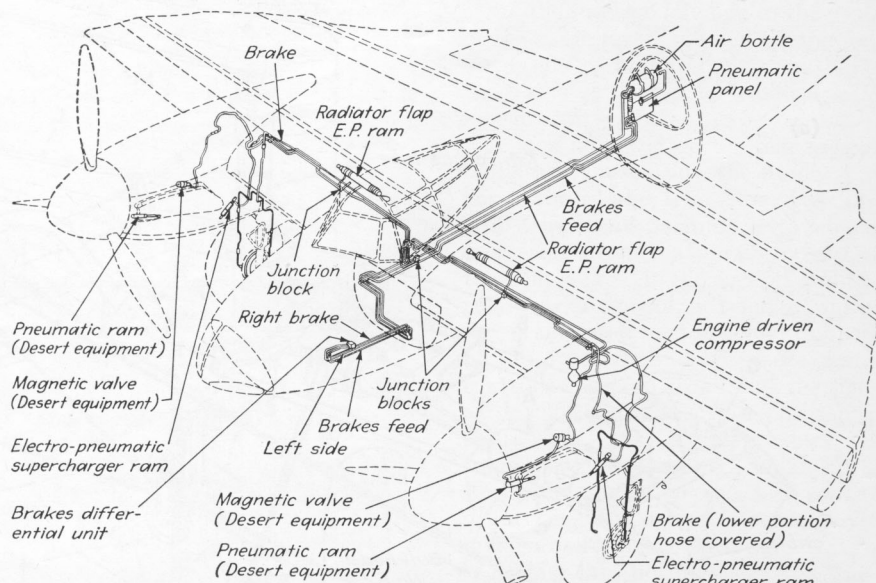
Pneumatic controls operate brakes, air-intake flaps, supercharger controls, and radiator flaps for regulating engine temperature. Compressed air is supplied by the left-hand engine-driven compressor and is stored in bottles for emergency use.
